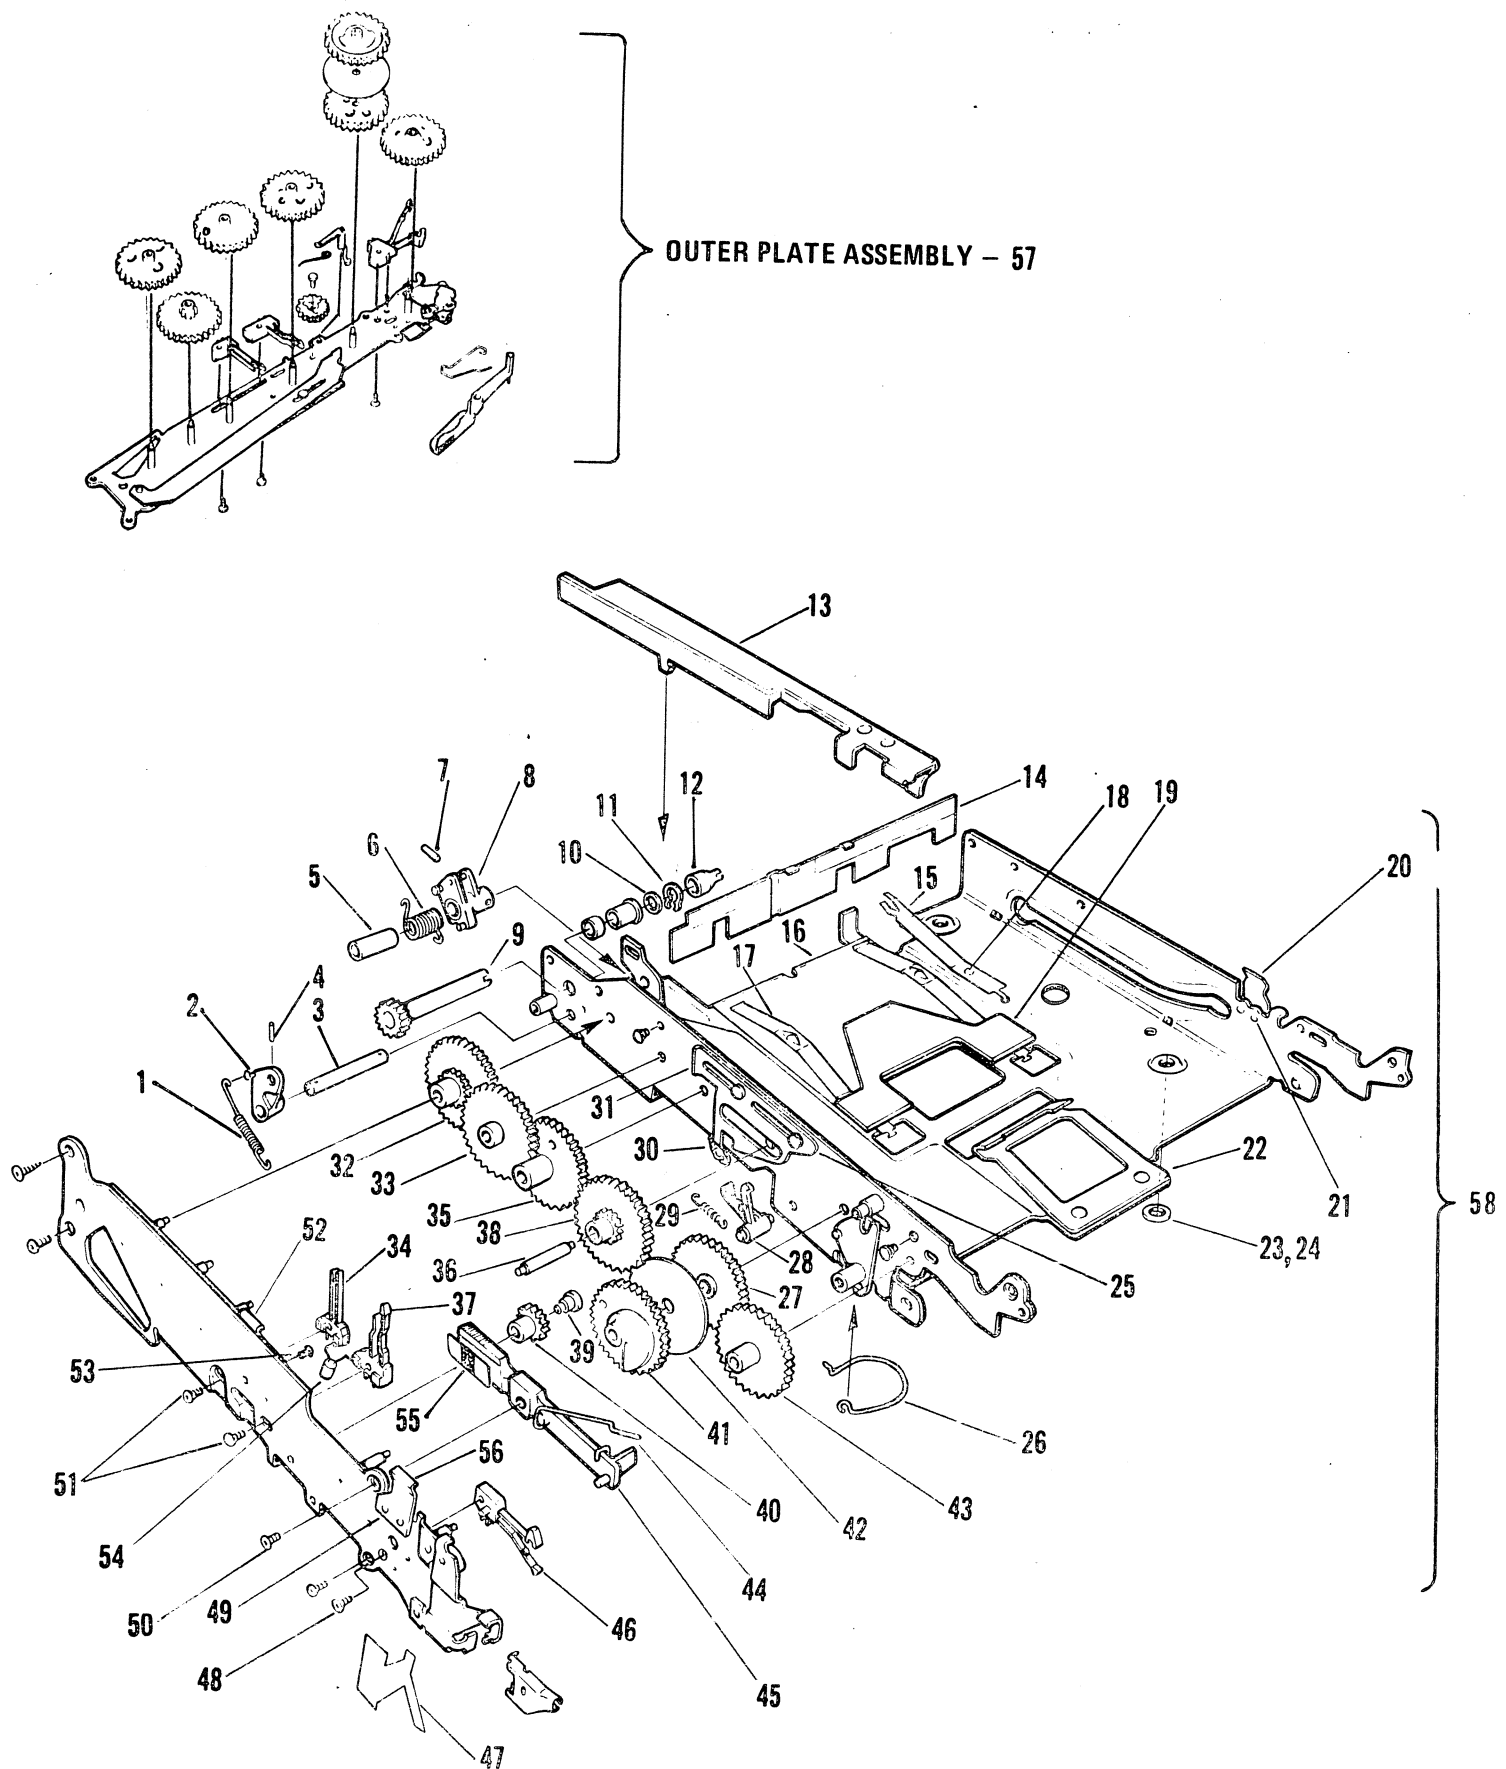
BOTTOM PLATE/OUTER PLATE ASSEMBLY
